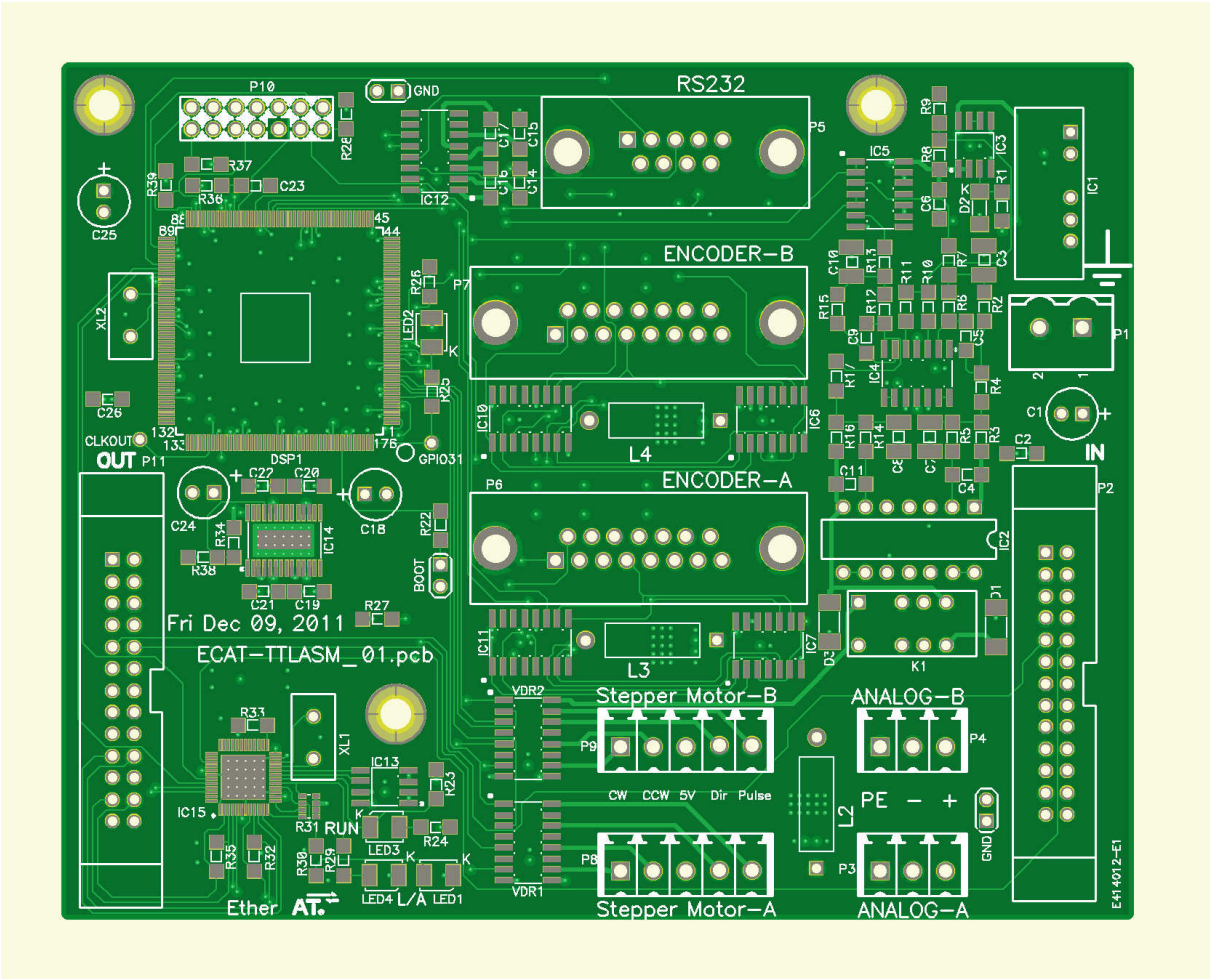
Unassembled PCB ECAT-TTLASM\_01 (TTLAI and TTLADO)
